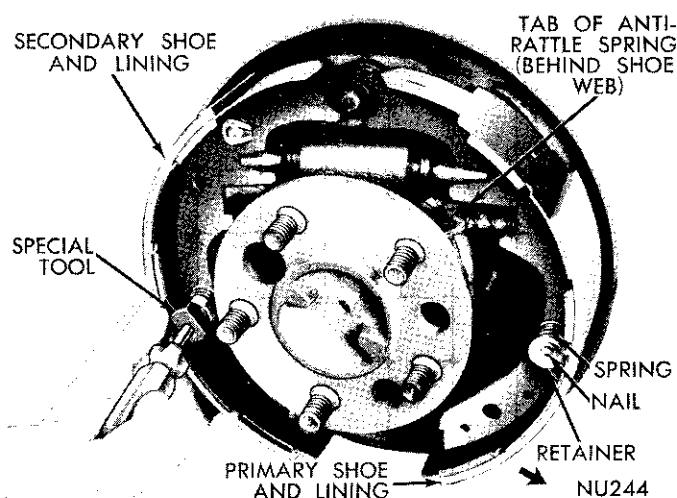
Removing or Installing Shoe Retainers, Springs and Nails (Right Rear)
